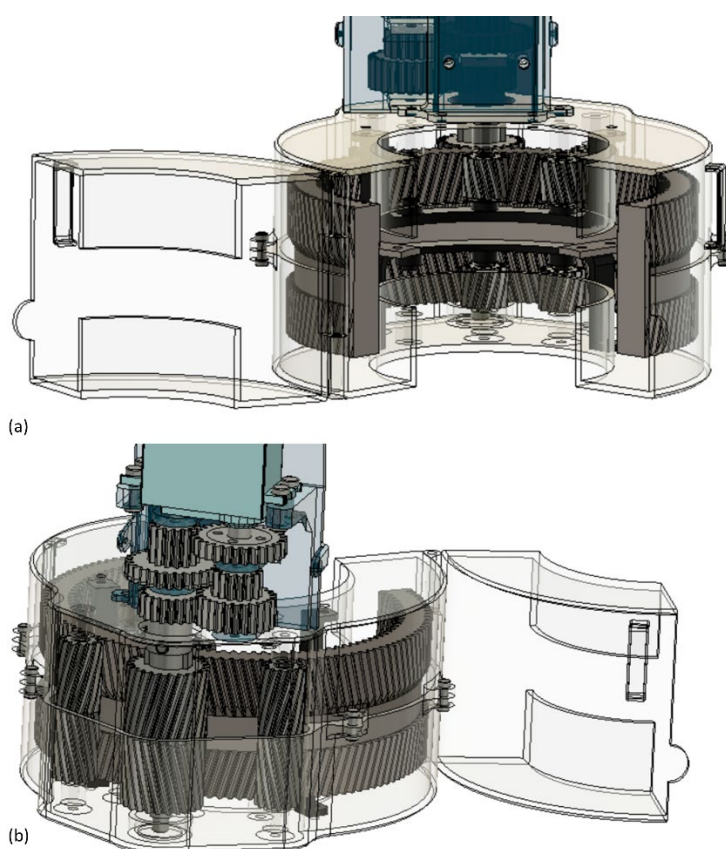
(a) Mechanism for flexion-extension movement of elbow joint. (b) Exploded view of mechanical joint.
